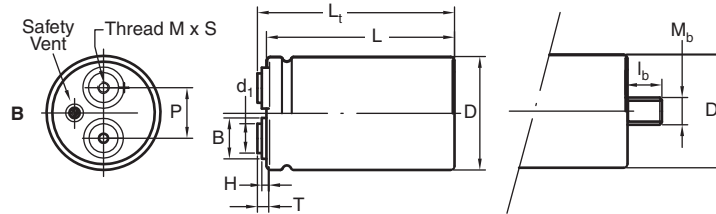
B: High current M6 disc: Screw Terminal (ST) and Screw Terminal Bolt nut (STB)
